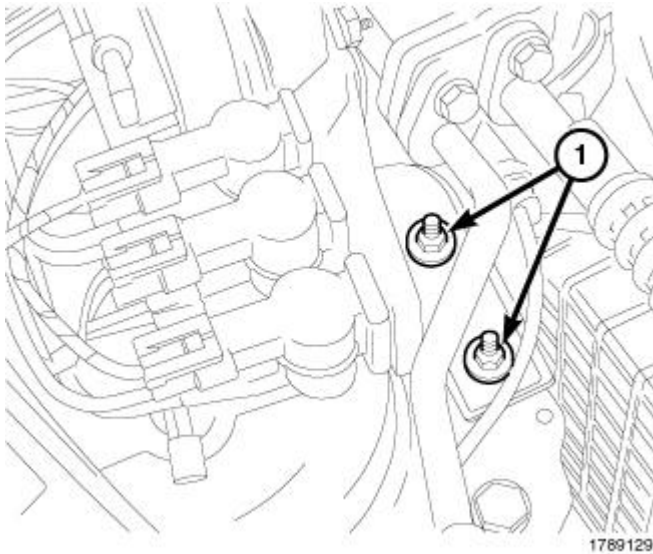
Nuts Securing Solenoid Mounting Bracket
